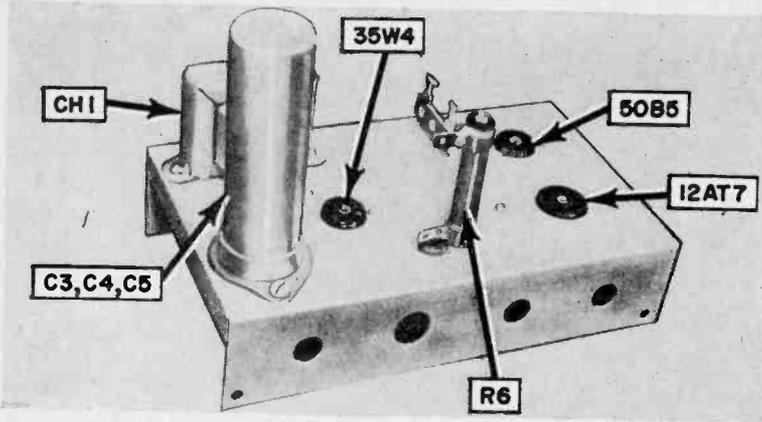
Above-chassis view of amplifier (at left). Some parts are mounted but not wired.
